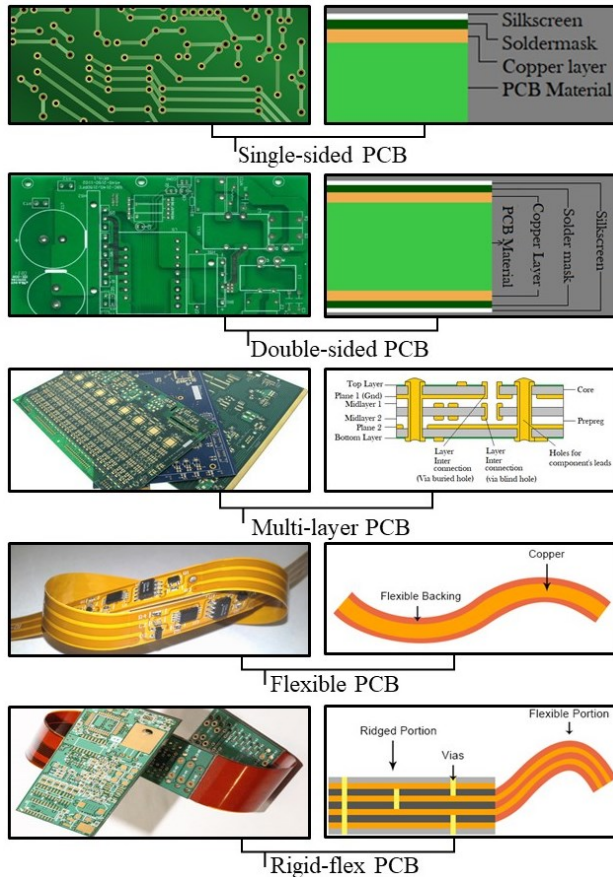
Examples of PCB types (Agarwal, 2015; Kansagara, 2018; Printed Circuit Board Introduction & PCB Types, 2018)
